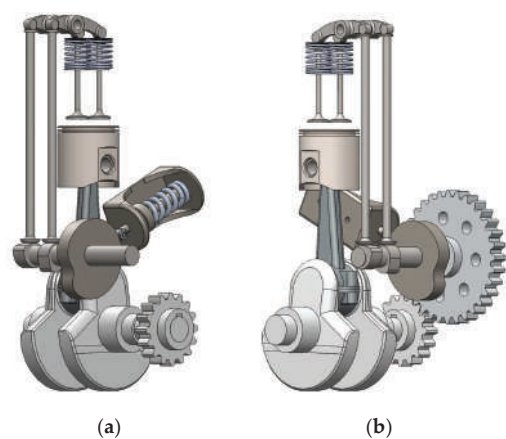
Perspective views—right side—of the CAD model from the (a) mechanism integrated on the single-cylinder engine, in image (b), the camshaft gear was removed to show the positioning of the balancing cam.
